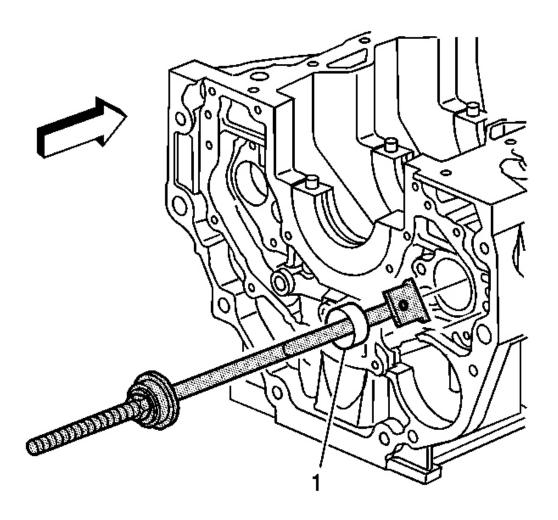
View Of Left Bearing Courtesy of GENERAL MOTORS CORP.
